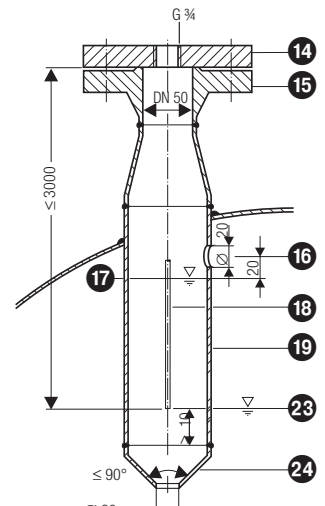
Protection tube (provided on site) for installation inside the boiler
